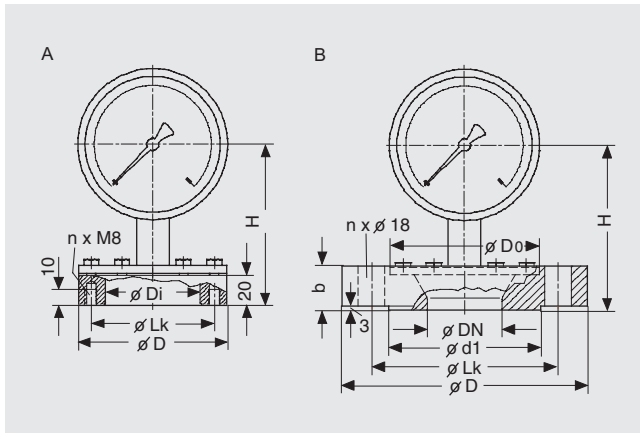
/154 Pressure gauge with limit contacts, measuring flange closed; dimensions
